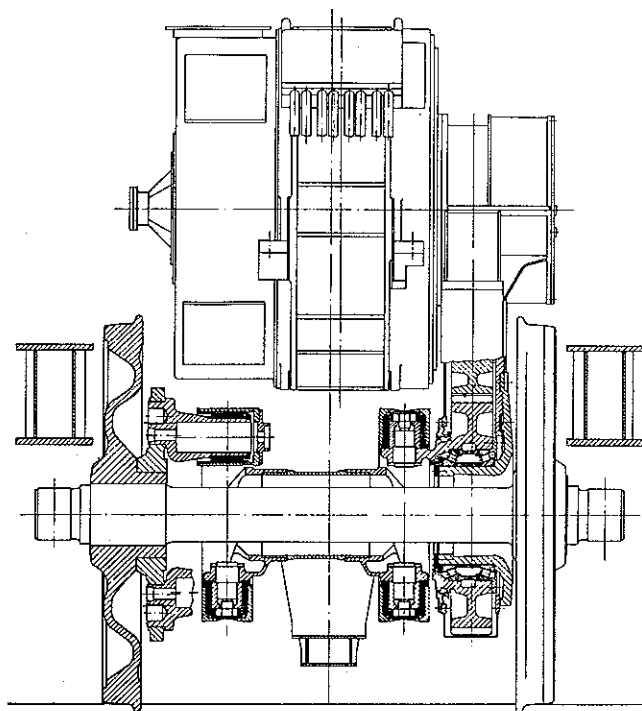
Cross section of drive system of locomotive adapted for adhesion testing.
